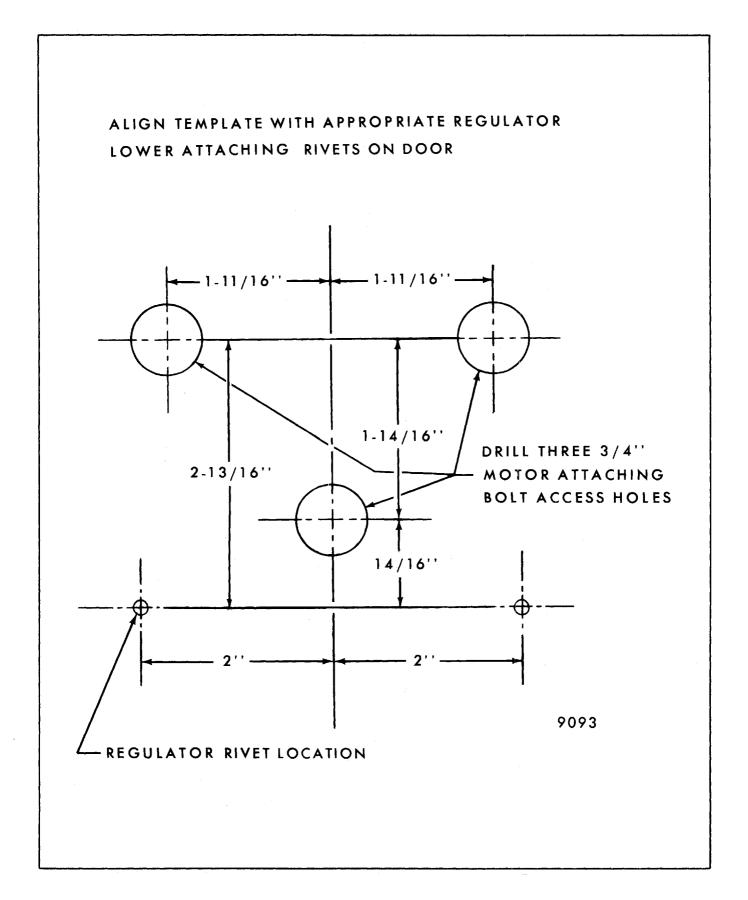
Window Regulator Reference Points for Locating Window Motor to Regulator Attaching Bolts - F Styles
